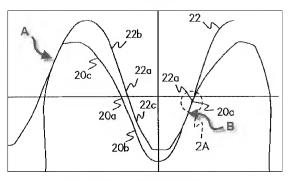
Figure Y: View of tooth flanks of Berlinger Jr. et al.
